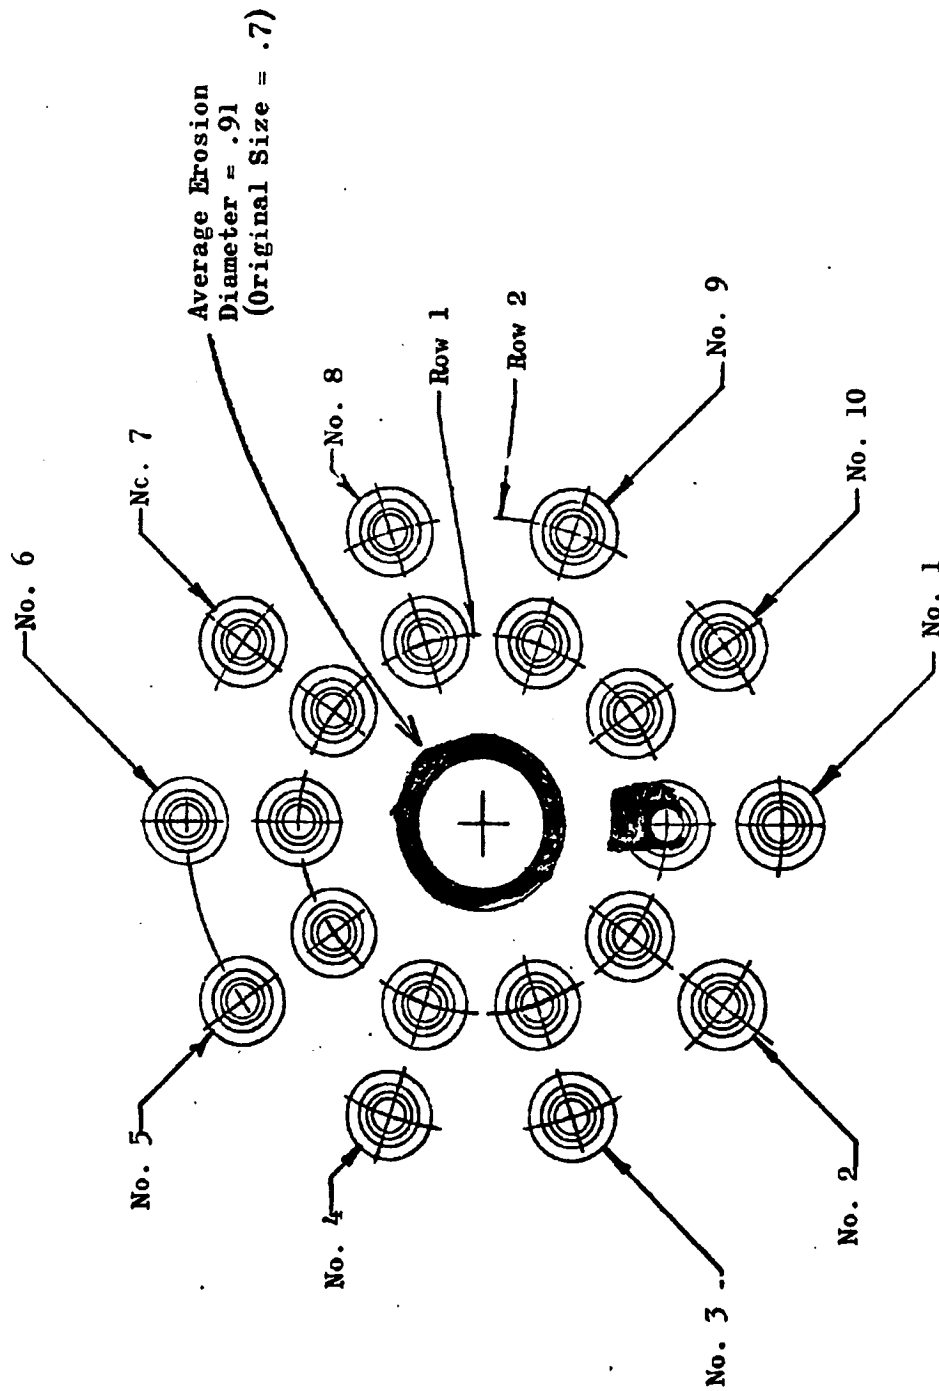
ASI Nozzle (Main Injector) Showing Erosion, Engine J016-4, Test J13-041, Posttest Injector Condition
